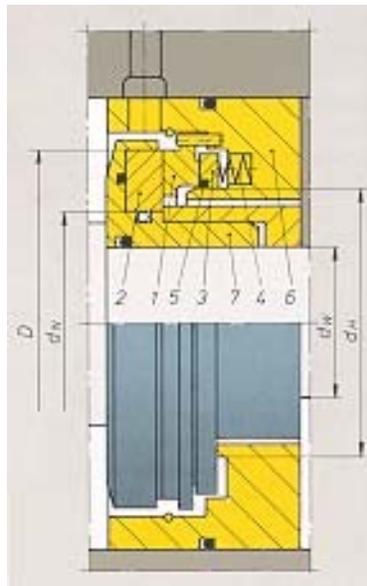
Cross section of a gas seal. 1 Stationary seal face (sliding ring); 2 Rotating seat (mating ring); 3 Thrust ring; 4 Compression spring; 5 O-ring; 6 Housing; 7 Shaft sleeve with cupped retainer. (*EagleBurgmann DGS*).
